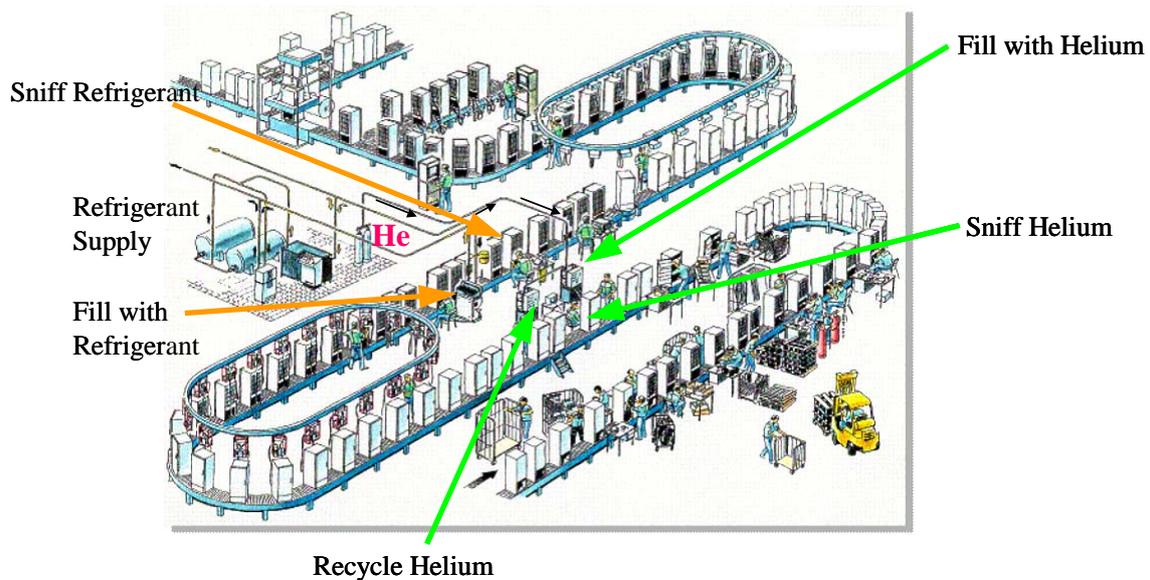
Assembly line for refrigerators with helium pre-testing and final inspection for refrigerant leaks.
